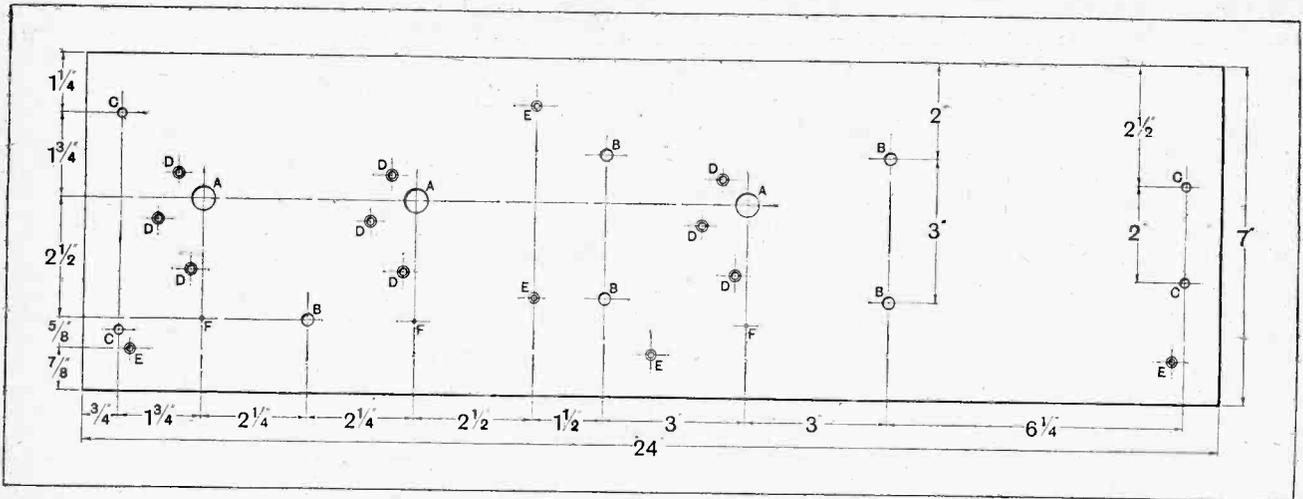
Drilling details of the panel. A, 1/2in. dia.; B, 1/4in. dia.; C, 3/16in. dia.; D, 5/32in. dia., countersunk for 4 B.A. screws; E, 1/8in. dia., countersunk for 6 B.A. screws and No. 4 wood screws; F, 3/32in. dia., tapped 6 B.A.
